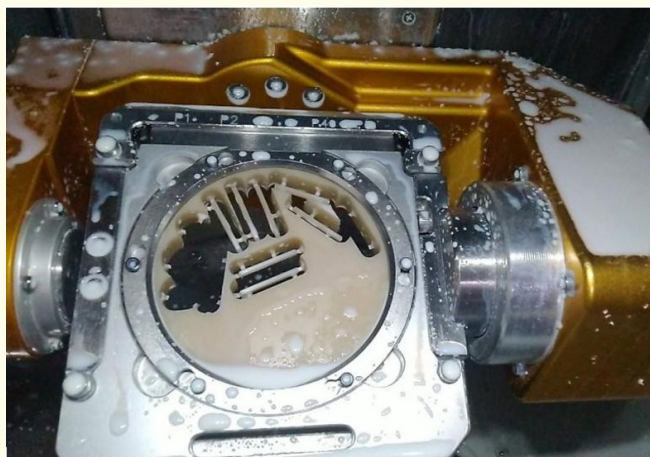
Milling of Group 1 CAD/CAM PMMA resin blanks.
